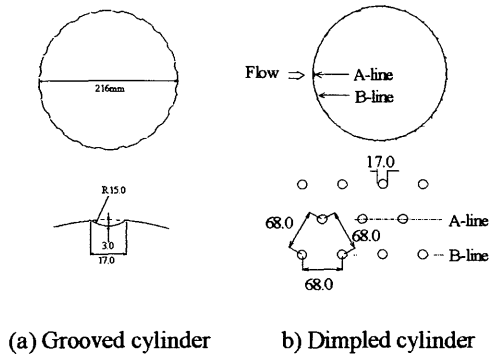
Arrangement of the grooves and dimples for each cylinder. Dimensions are in mm.
